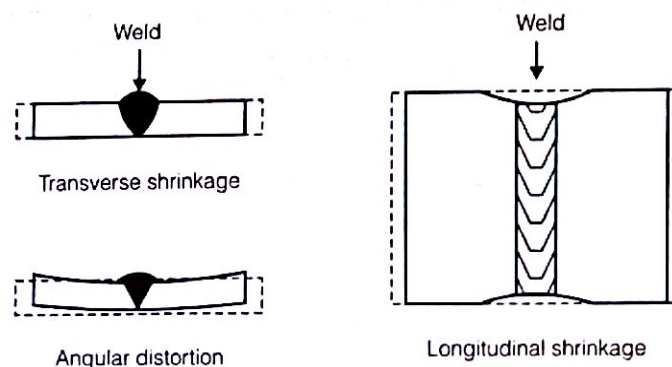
(b) Distortion of parts after welding
